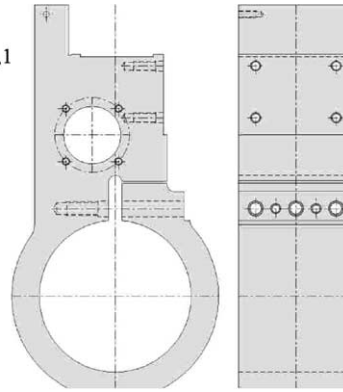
Working steps for manufacturing the workpiece B (see Table 1).
